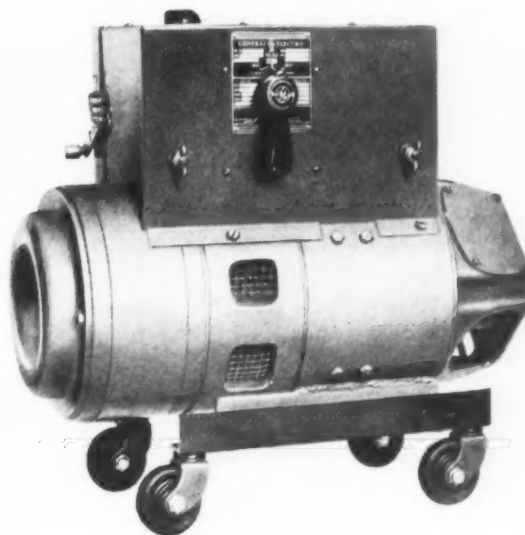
General Electric Direct-current Portable Motor-generator Arc Welder
